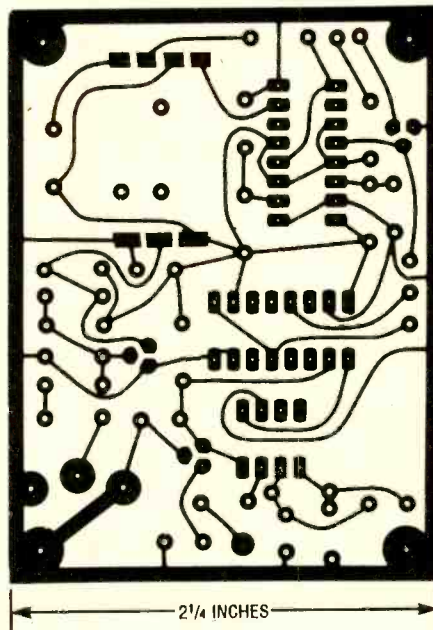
The author's prototype of the counter was built on a small printed-circuit board, the template for which is shown here.
